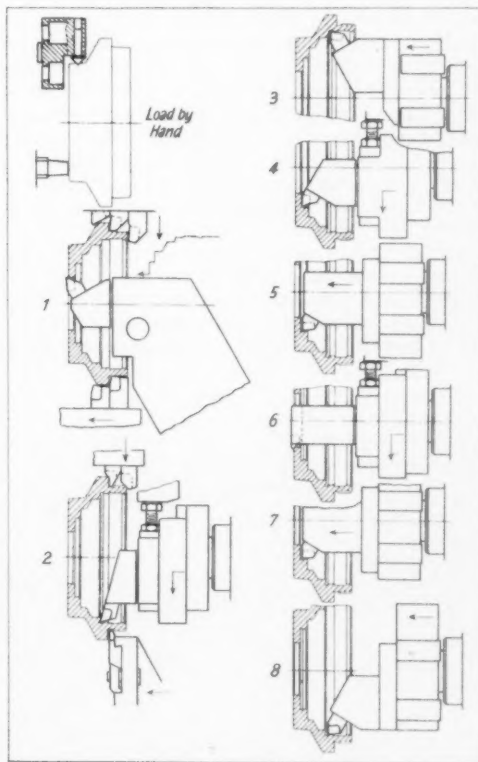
Tool Layout for Machining the Screwed Flange on a Tarex Automatic Fitted with a Hydraulic Copying Attachment. After the Internal Form has been Rough Copy-turned, Certain Diameters and Faces are Finished with Turret Tools
